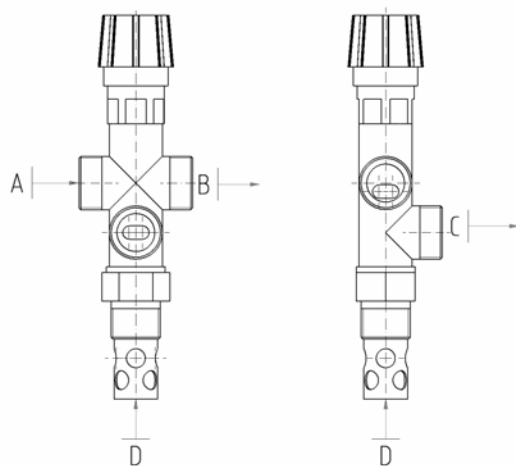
Boiler with valve DBV 1 – 02 – connecting dimensions
